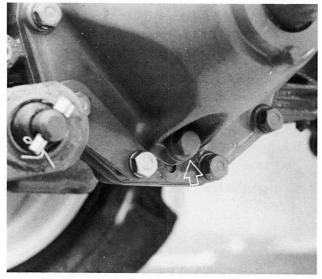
Transmission, Rear Axle Center Housing and Rear Axle Oil Drain Plugs
